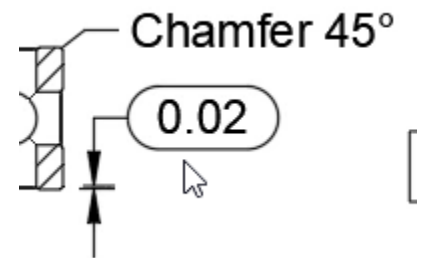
Inspect the other ways to reference a chamfer's geometry
